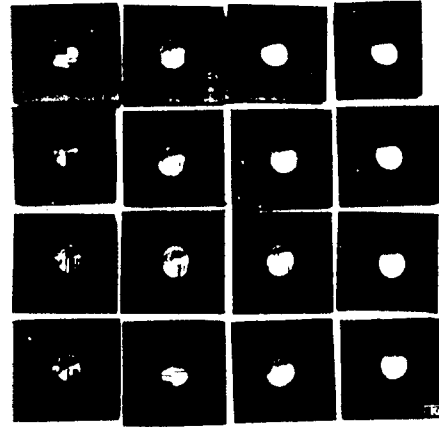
Photograph of the drilled specimen (Type-C drill)
